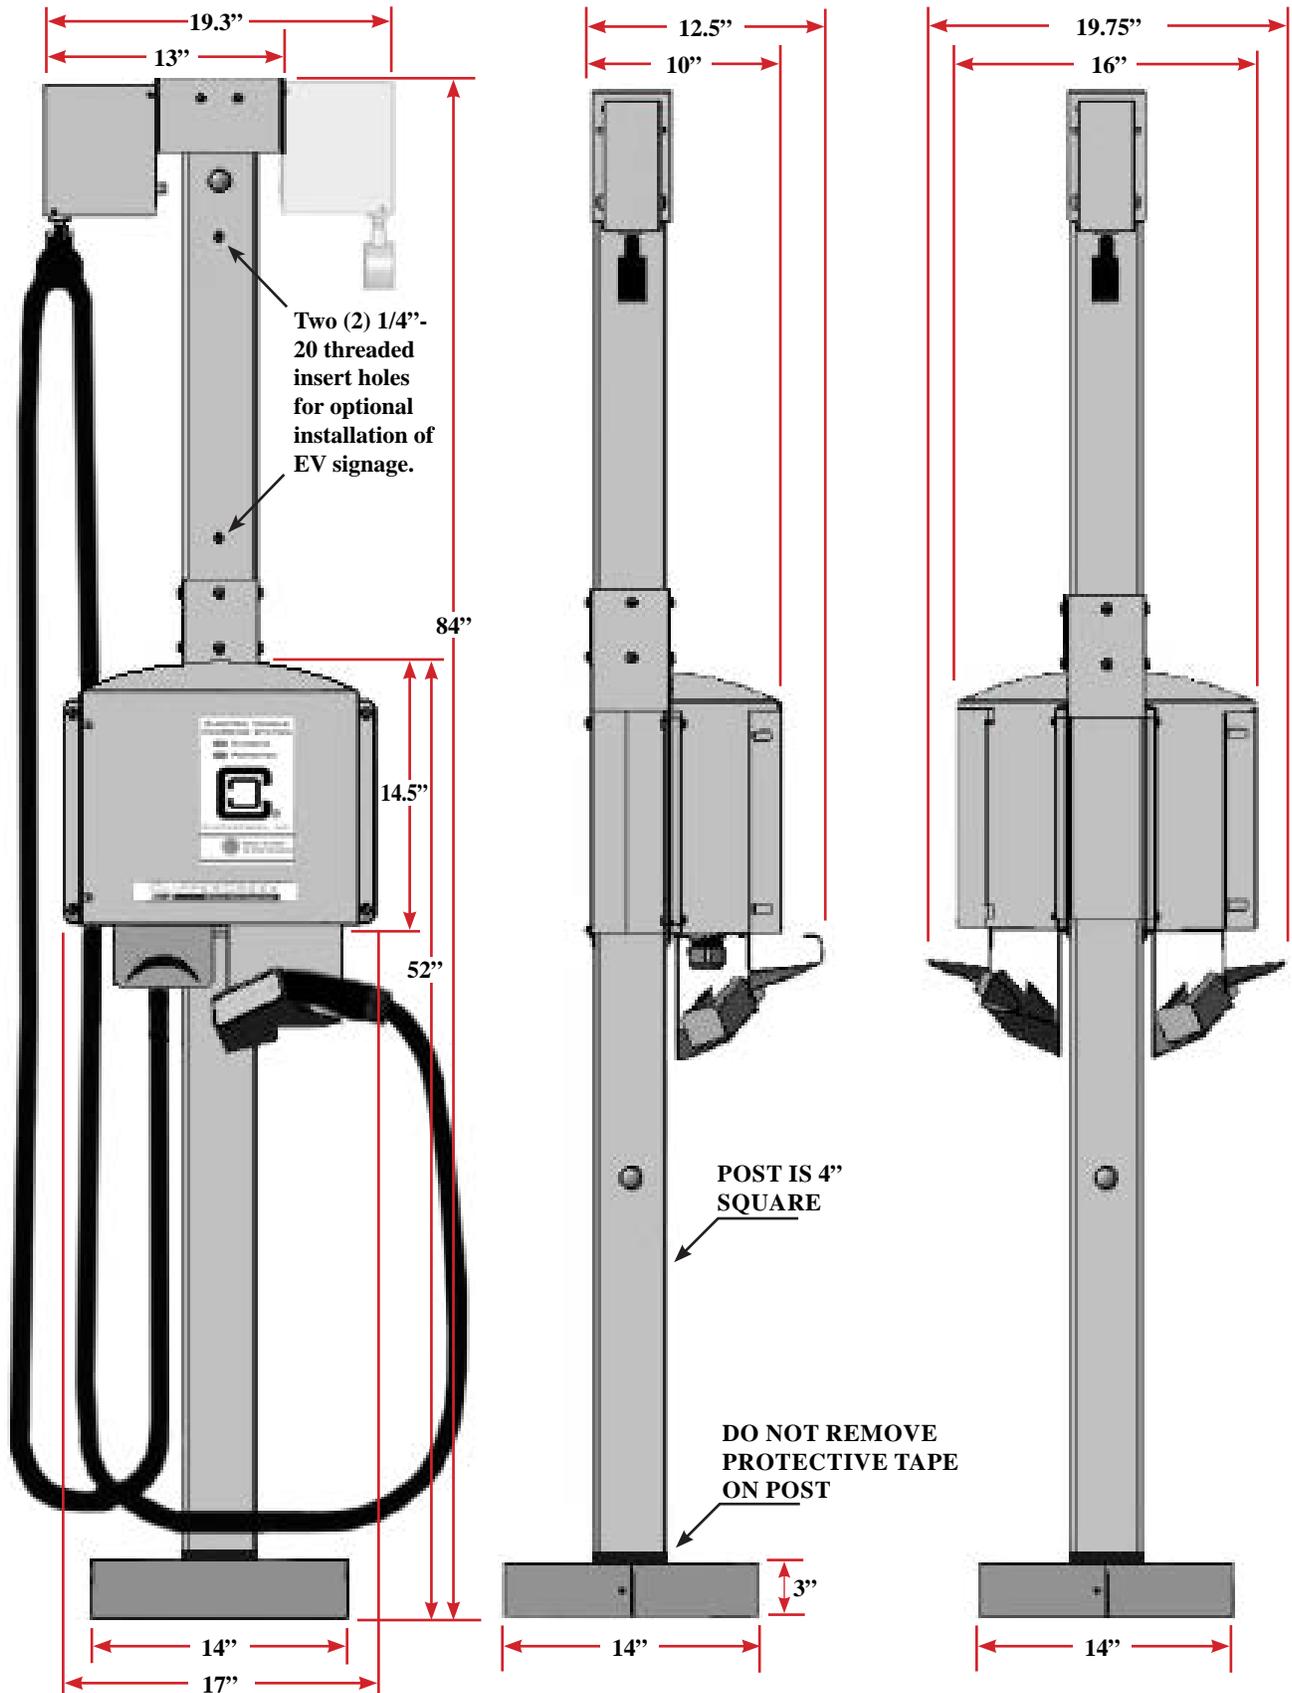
An Installation Cross-Section of a CS Single-Mount Pedestal Extension
